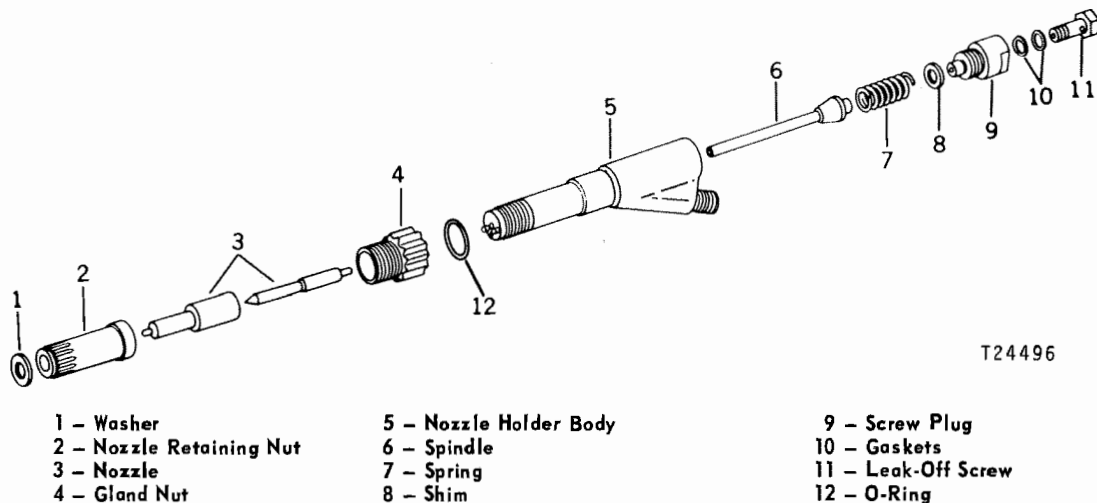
Robert Bosch 21-Millimeter Nozzle Parts
